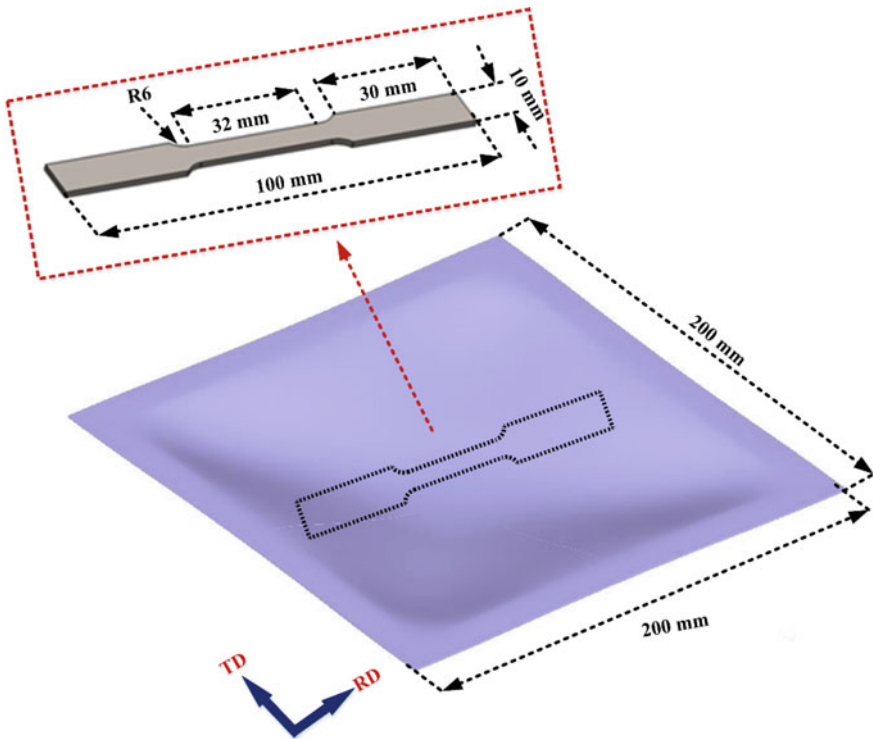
Tensile test sample obtained from the sheet deformed using the shock tube
